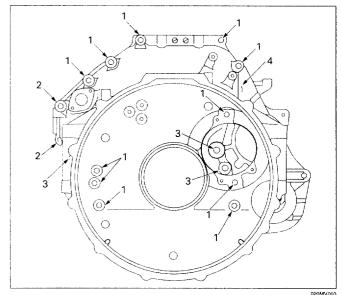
Flywheel Housing Bolt Tightening Sequence
